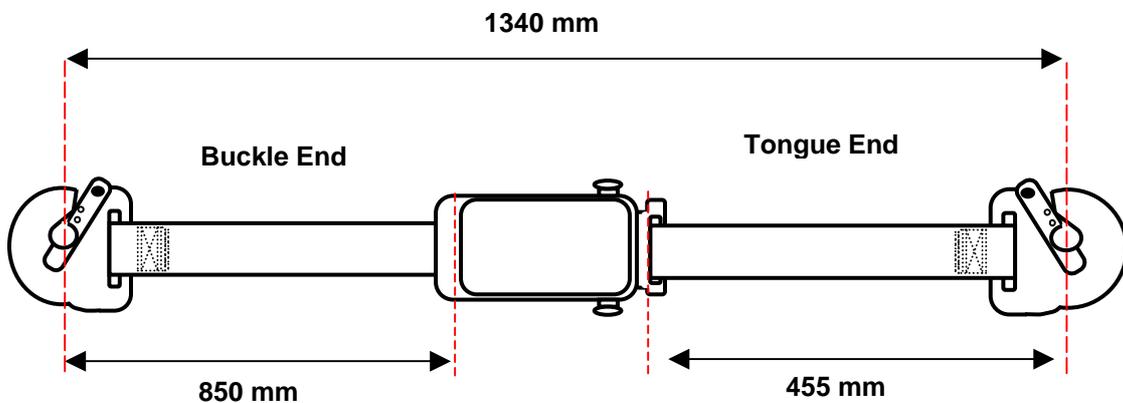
Dimensions of a 1340mm long belt in its fully extended condition
